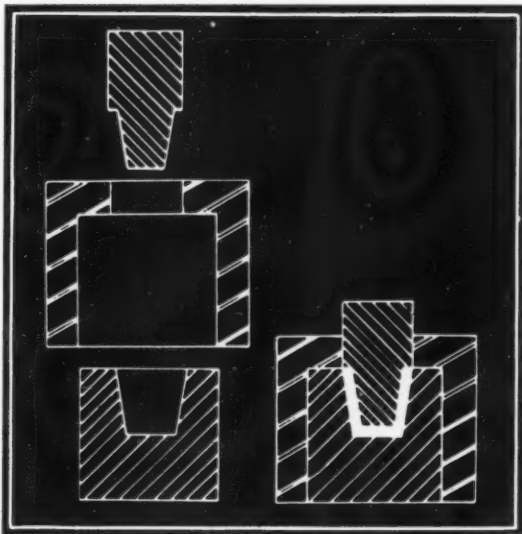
Positive molds require three parts and are limited to compression molding of large pieces using bulky materials
